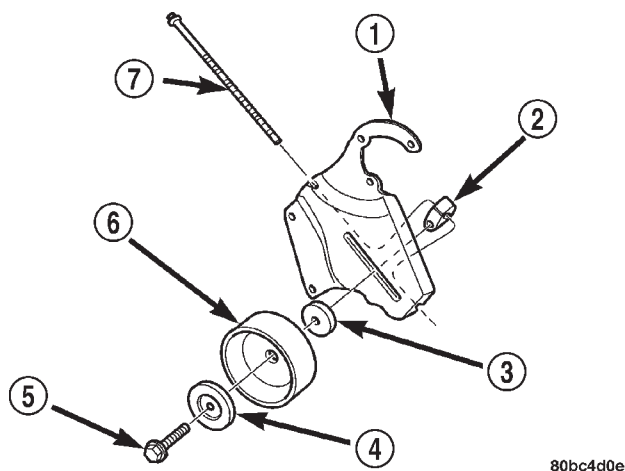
Accessory Drive Belt Tensioner—2.5L Engine
